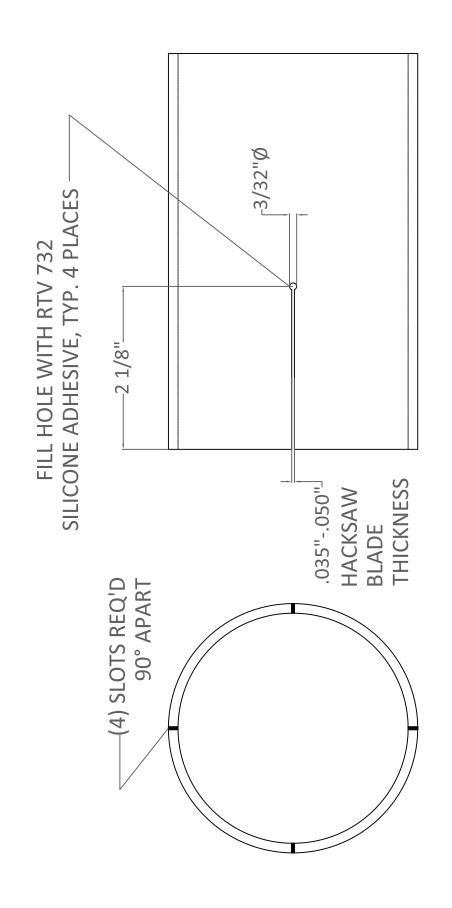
SLOT & DRILL UPPER END OF MG-20 AND MG-30/40 MAST TUBE (Ref. Section 9.4.1)
